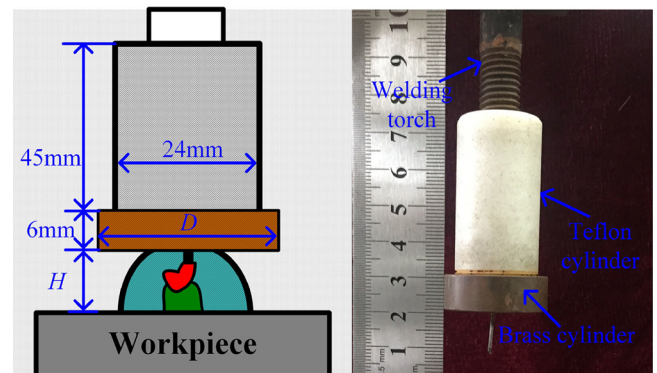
Schematic view of the mechanical constraint assisted underwater wet welding.
